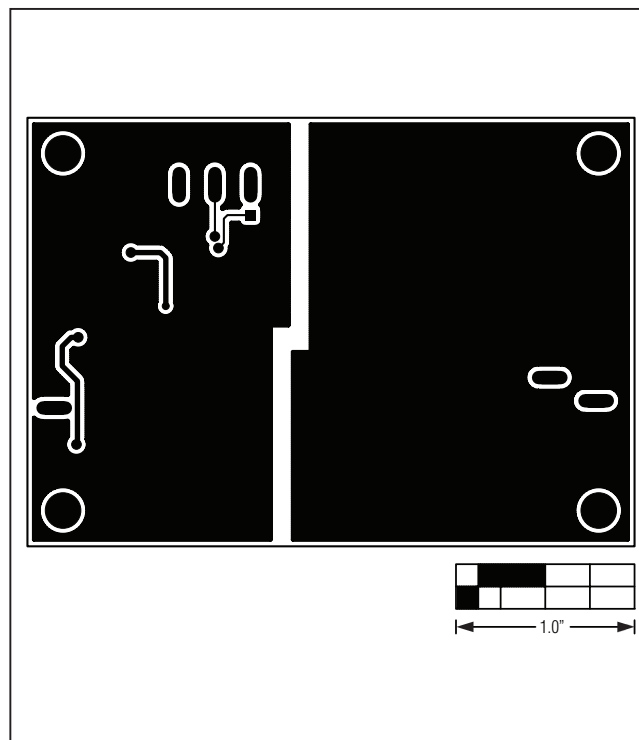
MAX17500A EV Kit PCB Layout—Solder Side
